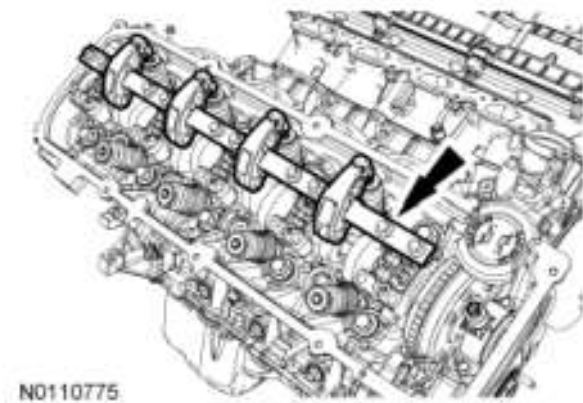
Locating RH Intake Rocker Arm Shaft Assembly
